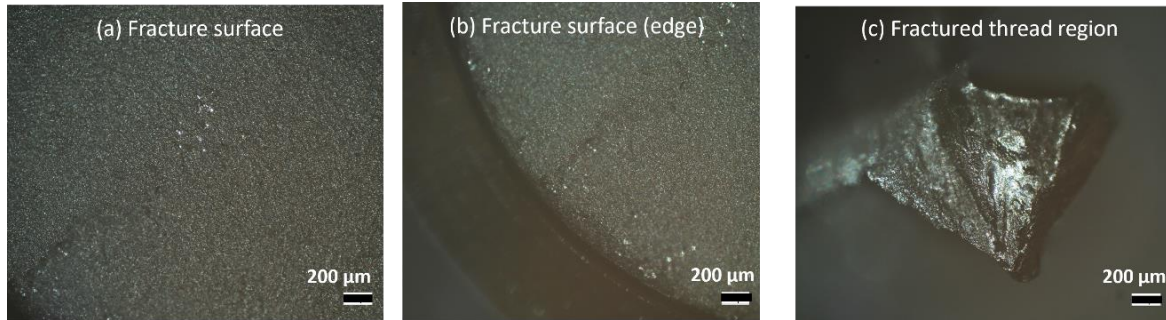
Optical micrographs of the fracture surface for reference machined (SM) samples: (a) and (b) fracture surface; (c) location of fracture in the threaded region. Fracture occurred in the threaded region.
